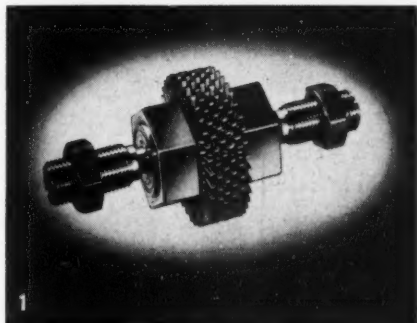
"Wise Type" Dresser Cutter Assembly showing standard fine tooth dresser cutter assembly.
